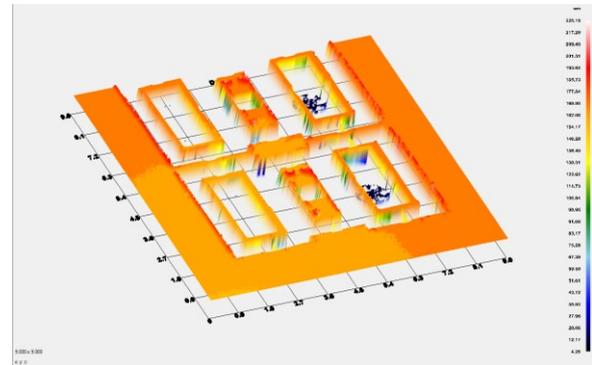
Dimensions parts of SMD package measured by optic noncontact profilometer. Standard SOT-23 packages dimension is 1,6 x 2,8 x 1,0 mm.
